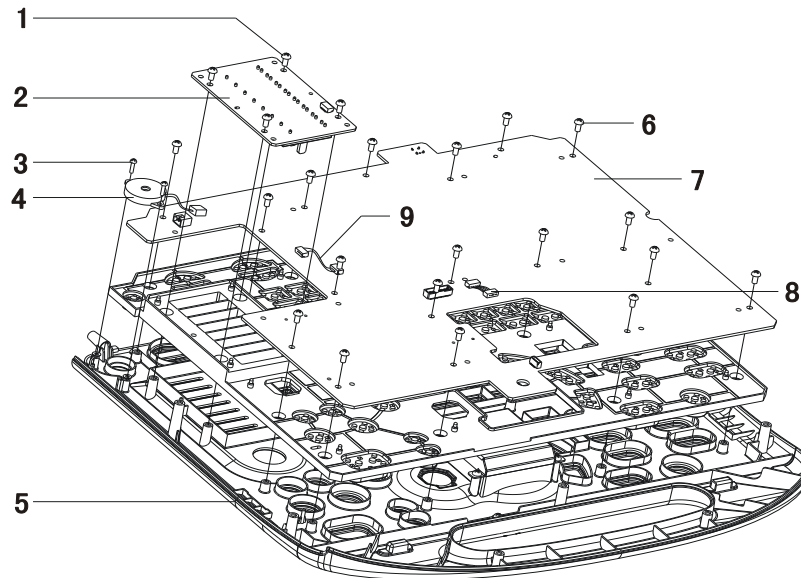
Removing TGC Adjusting Board and Control Panel
